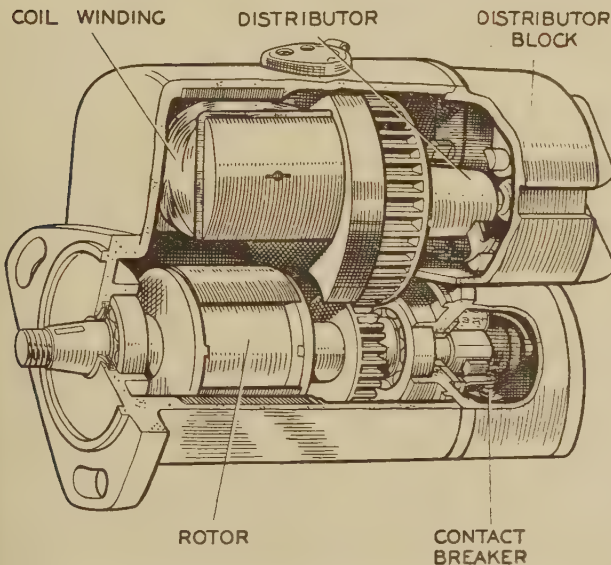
The Lucas R.F.4F. Rotating-magnet Magneto.
